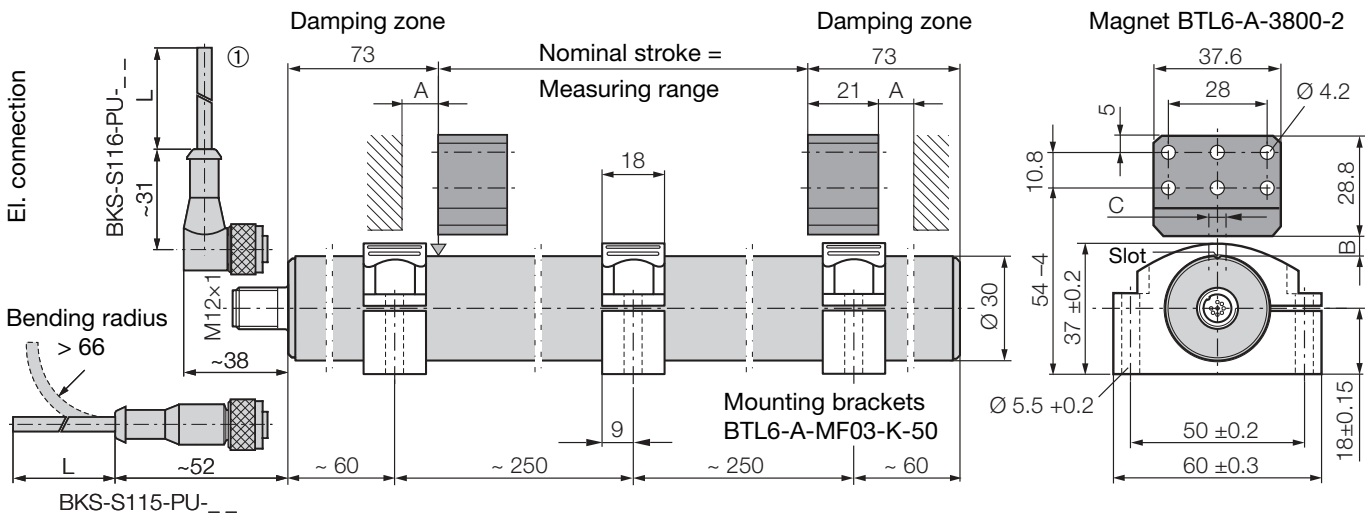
Dimensional drawing (BTL6...A1-S115 transducer with floating magnet BTL6-A-3800-2 and mounting brackets BTL6-A-MF03-K-50)
